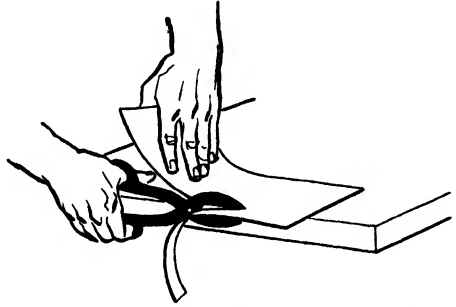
Trimming the edge of a piece of sheet metal.
